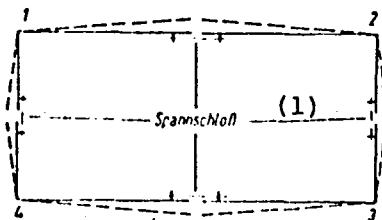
Construction of the holder for rectangular cross-section. Key: (1) spanner.
